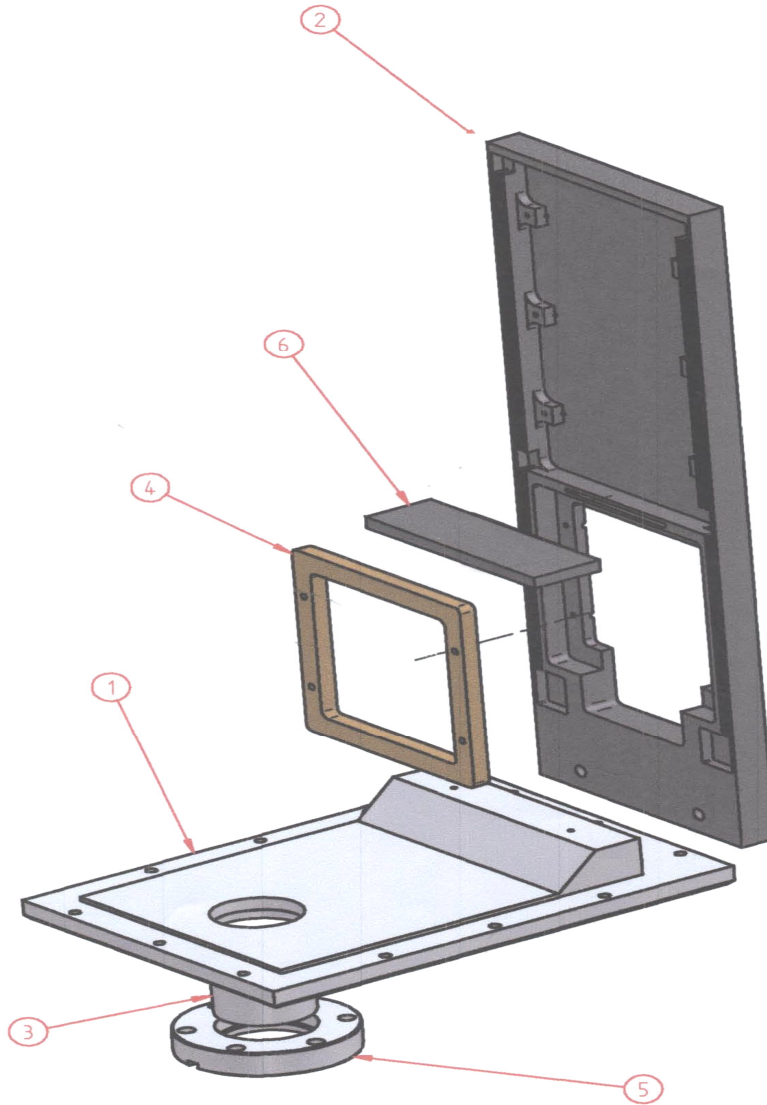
19. The insulating assembly plate (2) and its base plate (1) with tube and flange (3 and 5) to mount the feed-throughs, the spacer (4) and shield (6) used in experiment 1, as described in the text.
